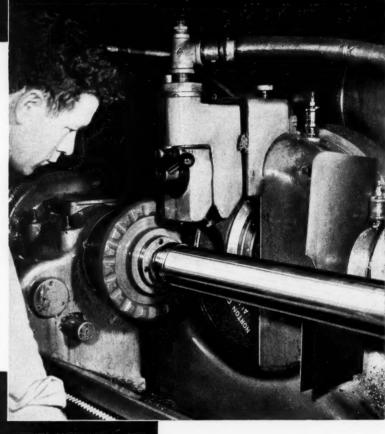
Boring the forged-steel firing chamber of the 75-millimeter recoilless rifle. The chamber is faced, turned, and chamfered in the same set-up
